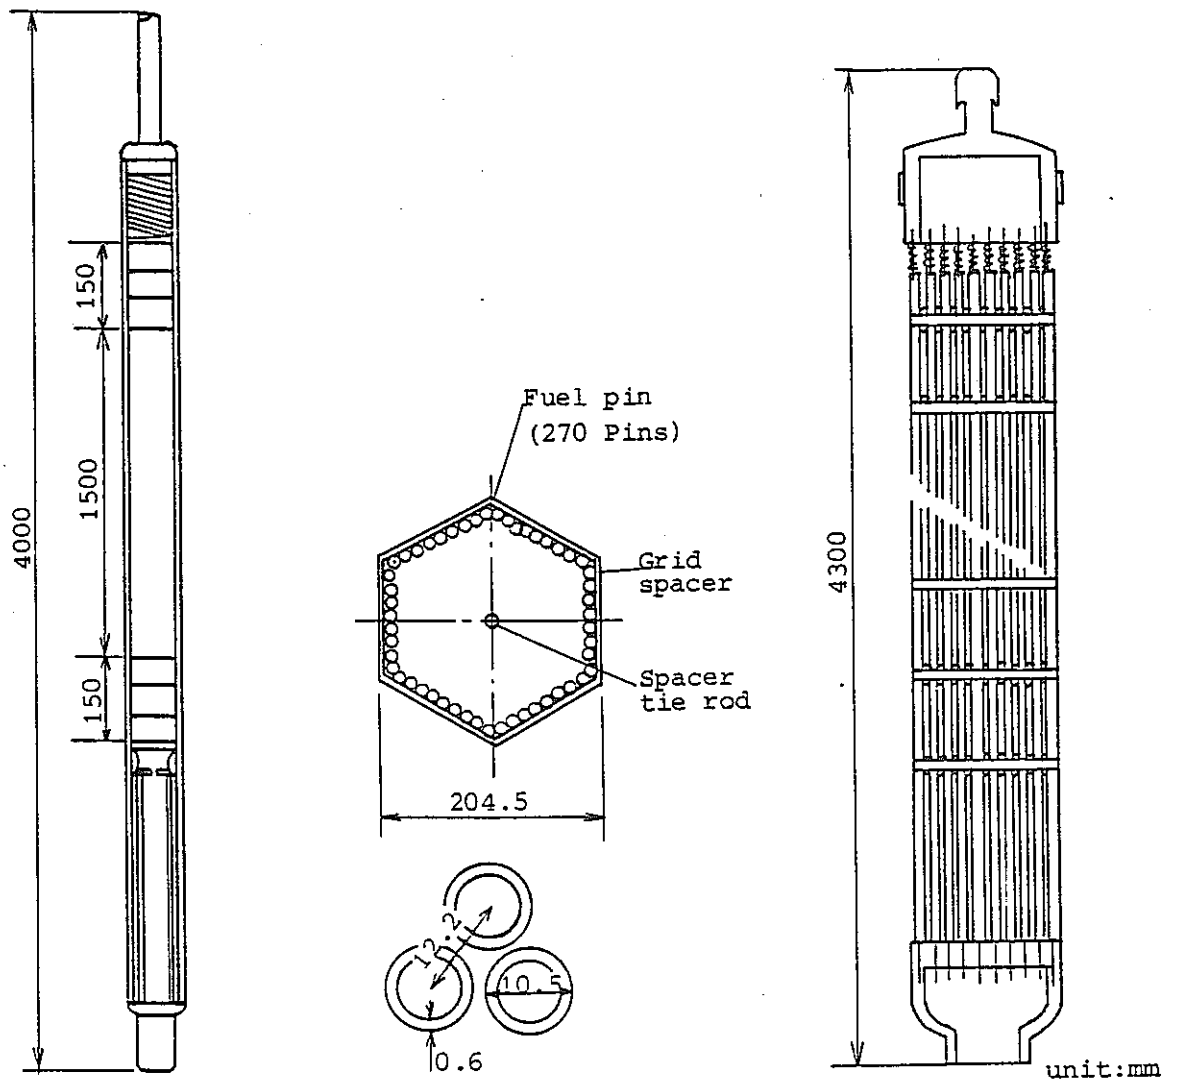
Schematic diagram of fuel assembly and pin for ductless core
